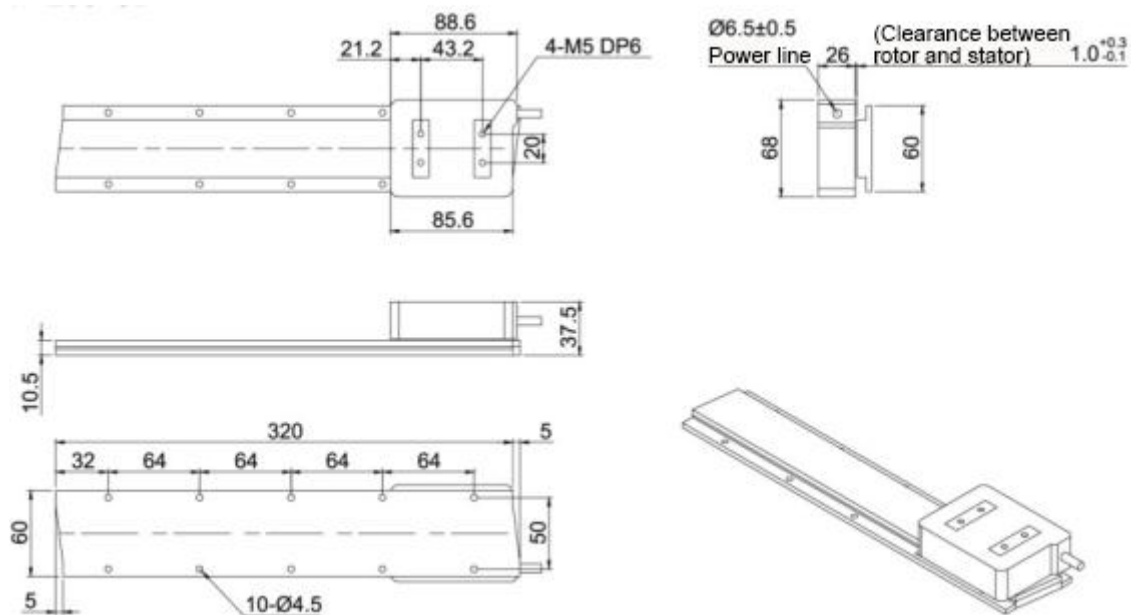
Dimensional drawing of WZCR-AZ60C1-□ motor
